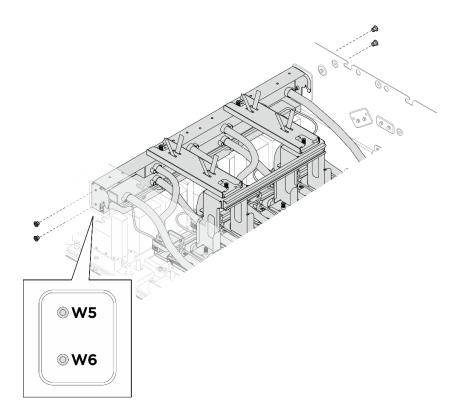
Installing the front H100/H200 GPU cold plate module manifold
